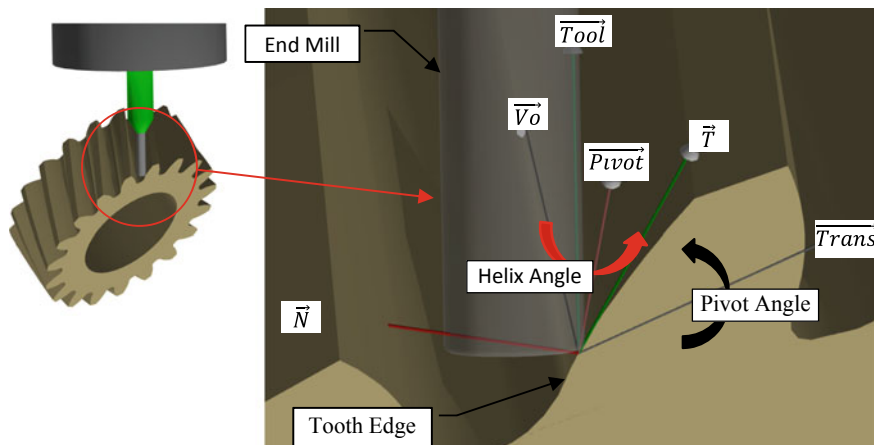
End Mill installation for Toe/Heel chamfering—helical and spiral bevel gears
